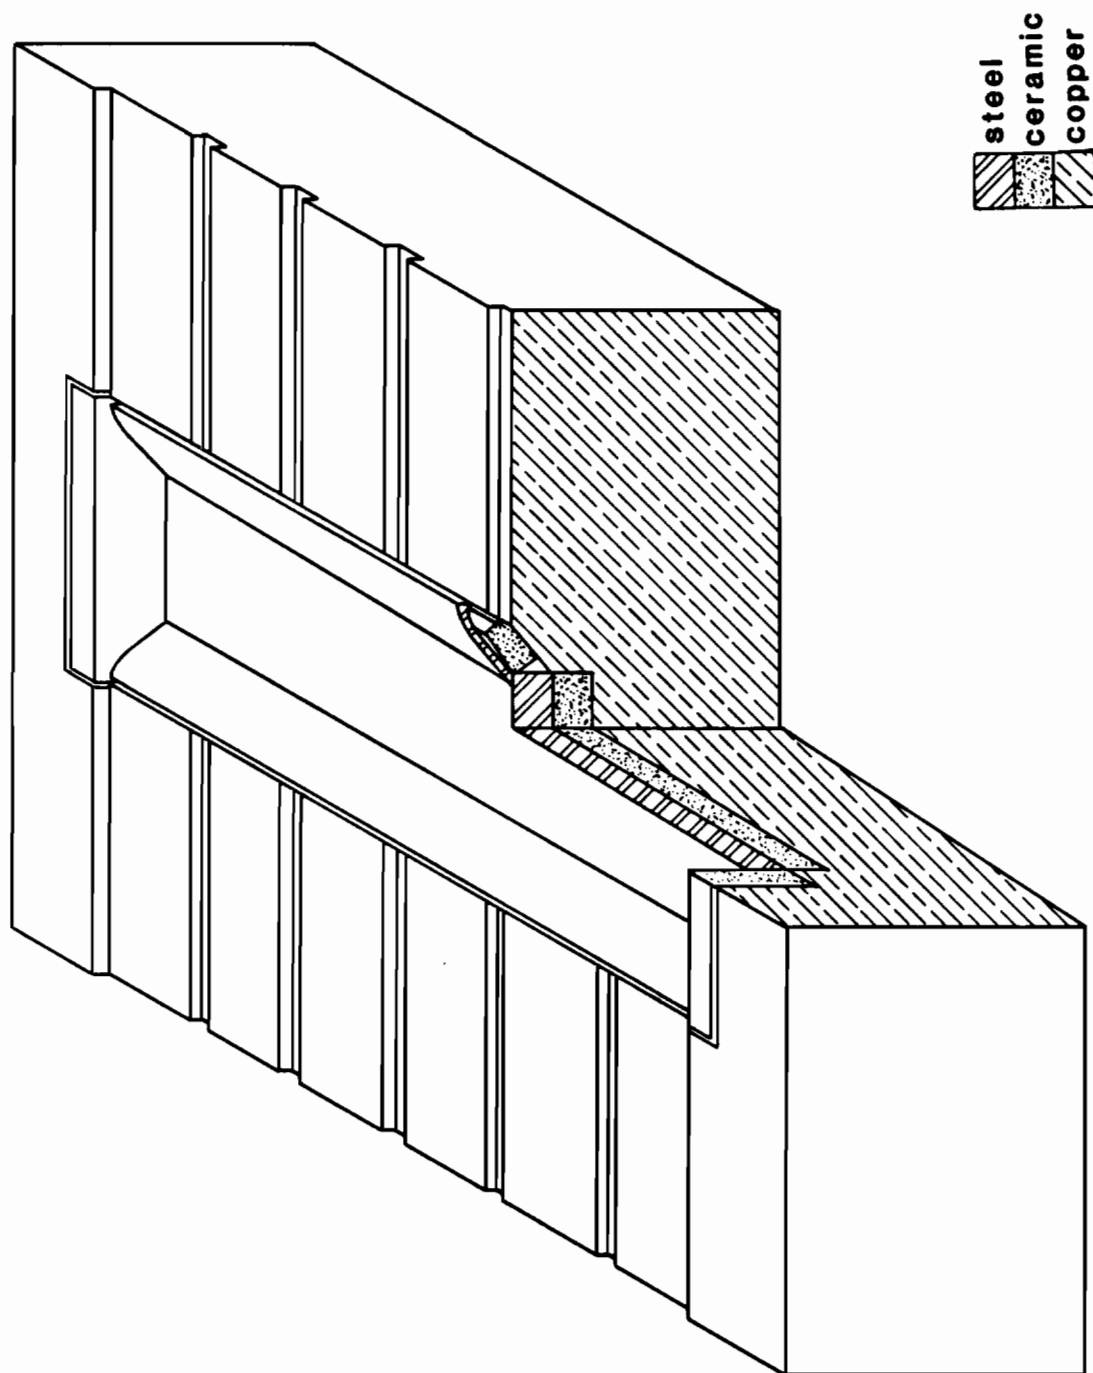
SCHEMATIC SECTIONAL VIEW OF THE WELD STARTING BLOCK.
